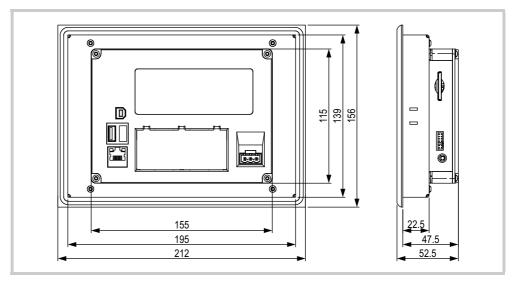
Mechanical dimensions of the 5.7" devices in mm
